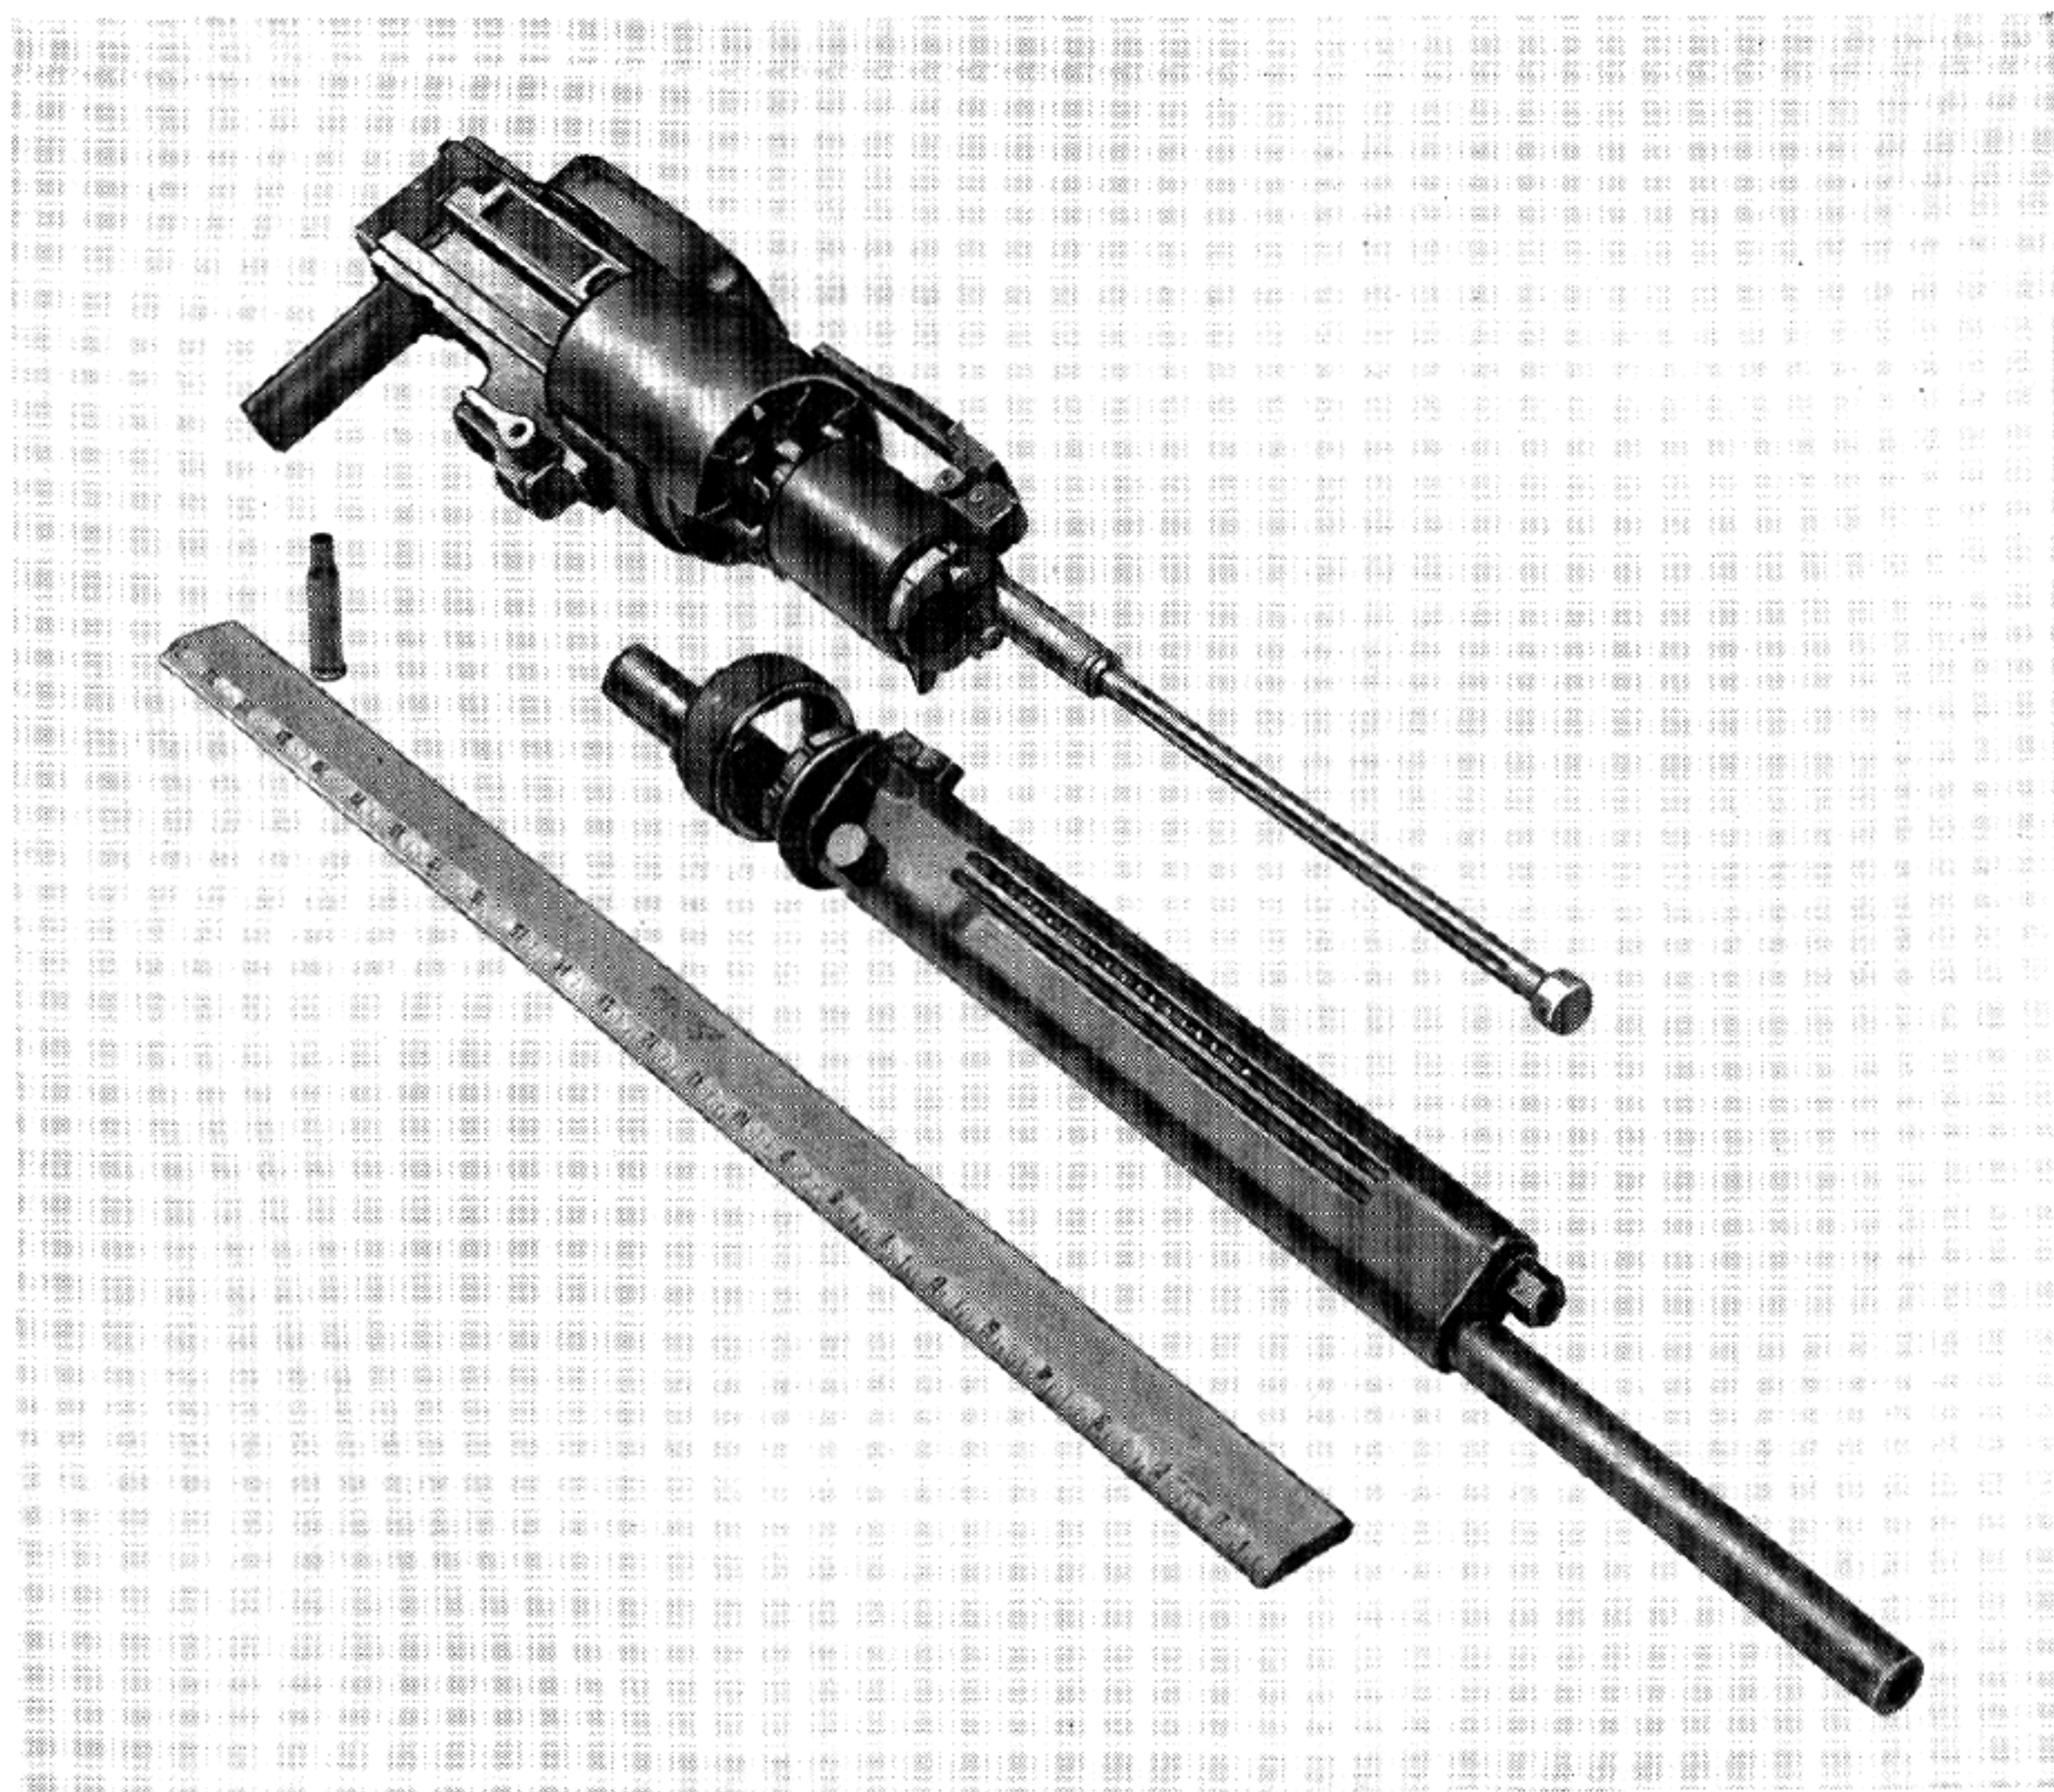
7.62-mm Shkas Fixed Gun, with barrel assembly removed.
